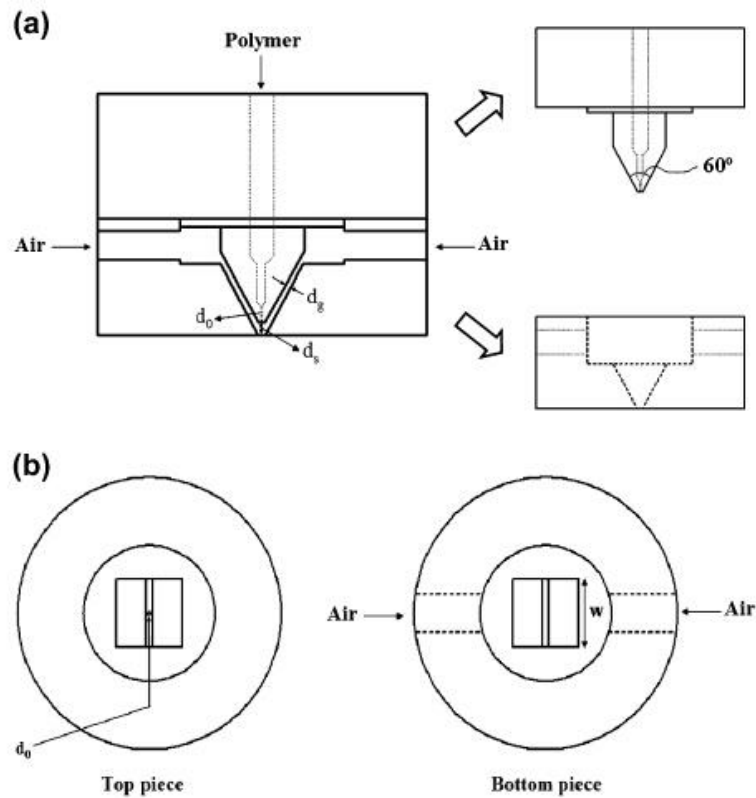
Schematic of the die used in the melt blowing method. (a) Sectional views of the die. (b) End-on views of the two parts ¹⁰⁴.
